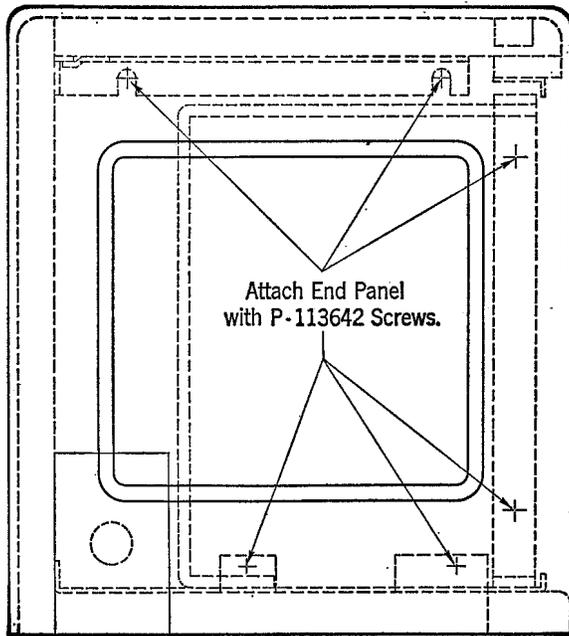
Method of Attaching End Panels (Single-sided Key Boxes)
